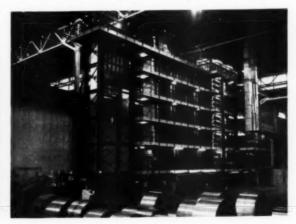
A stress-relieving furnace for heat treating welded structures installed at the Elswick Works of Vickers-Armstrongs, Ltd.
